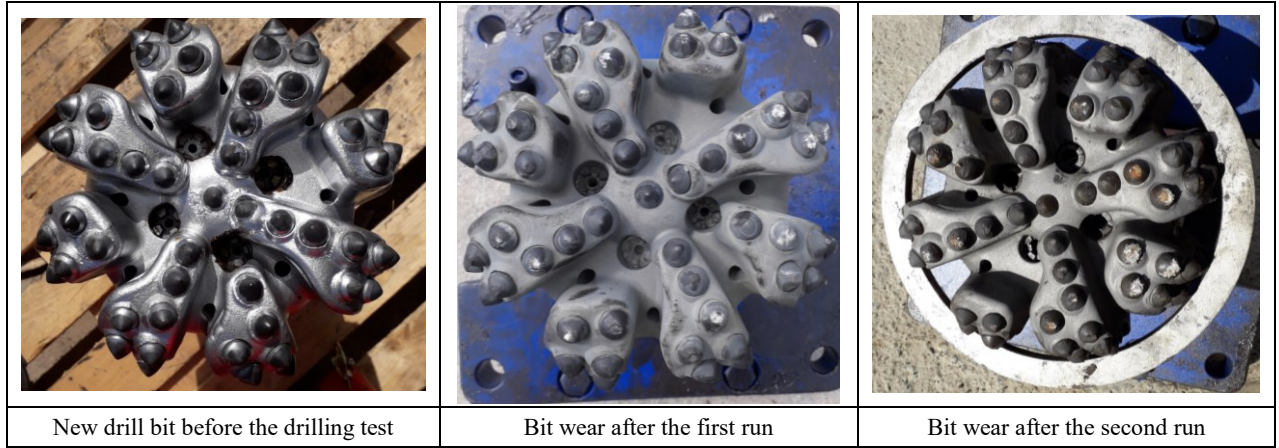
Damage on the cutters on the drill bit used in the drilling test #3.
